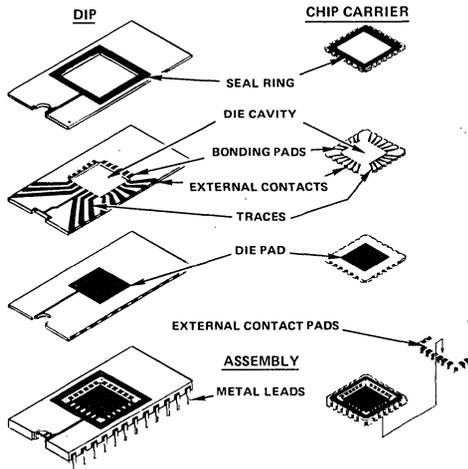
EXPLODED VIEW OF CHIP CARRIER AND DIP
